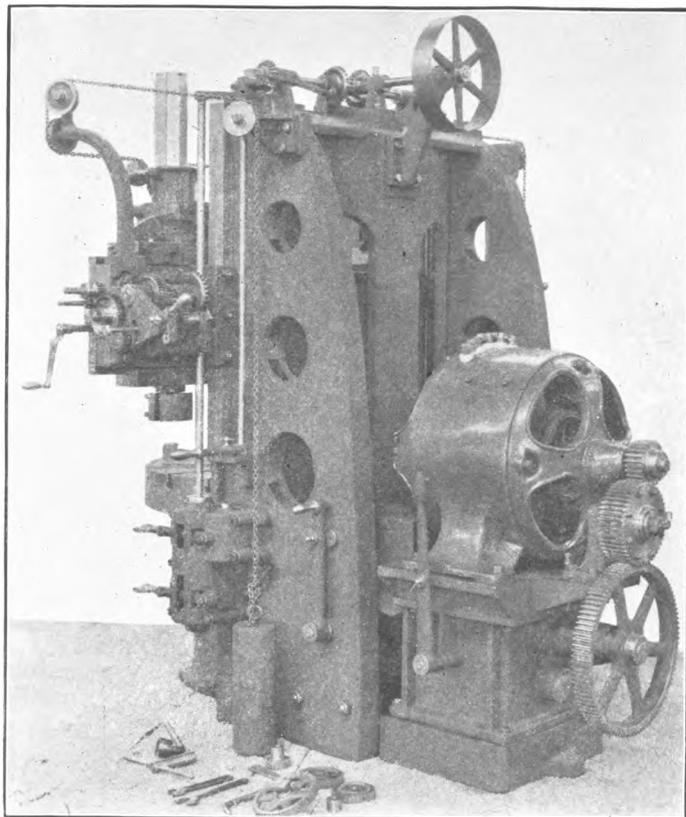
BORING MILL, WITH UNGUARDED GEARS.
